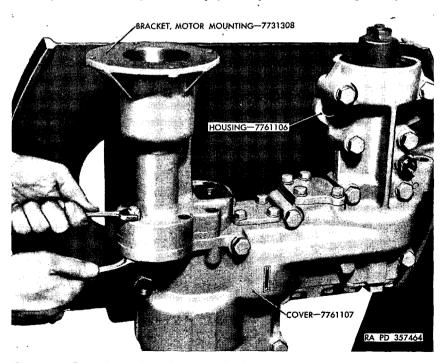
Removing or installing of hydraulic motor mounting bracket and drive gear assembly.
